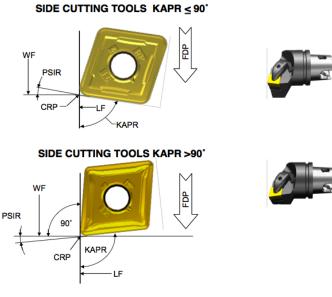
Cutting Tool Measurement Diagram 4 (Cutting Item – ISO 13399)
